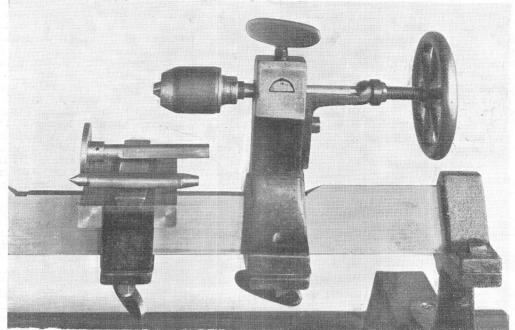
Showing the Tailstock drill chuck double-ended centre and original swivelling drilling pad mounted
